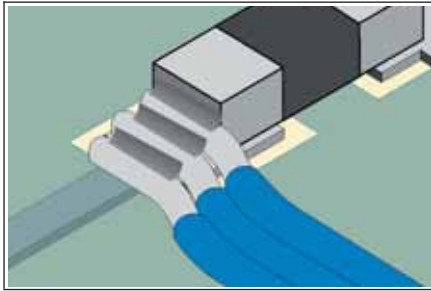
Not Recommended Multiple wires overhanging pad edge.
